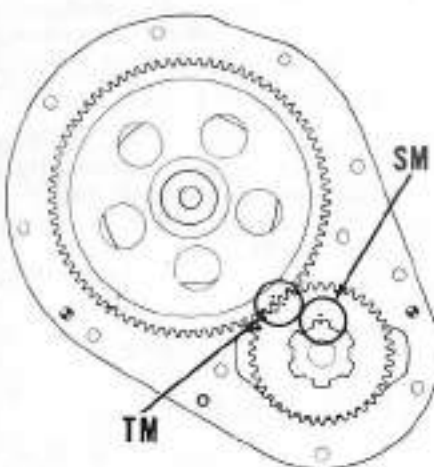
Drawing showing timing marks (TM) on crankshaft gear and camshaft gear of early three-cylinder engines. Current production camshaft gear has a tooth marked "D" for diesel engines and another tooth marked "G" for gasoline engines; use appropriately marked tooth meshed between the two punch marked teeth of crankshaft gear. When installing crankshaft gear, be sure spline marks (SM) are aligned as shown.
